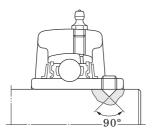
Drilled seat provided for shaft (for improvement in set screw tightening effect)
